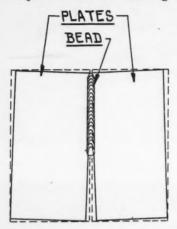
Dotted lines show original position of plates. Solid lines indicate plates after welding at high speed.
